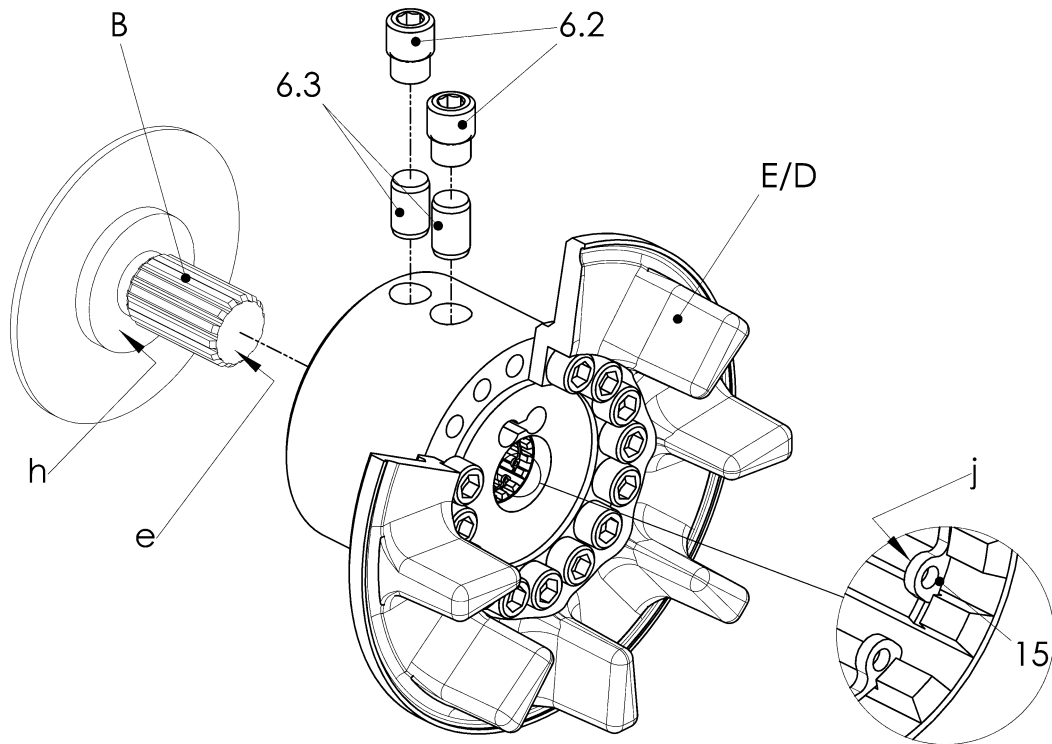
Mounting the inner part (E/D) with CENTALOC clamping
